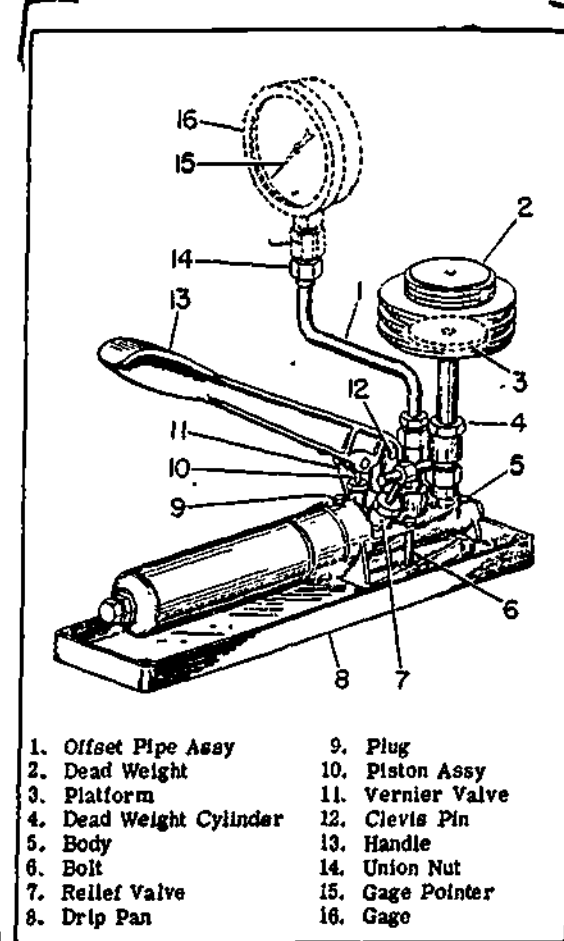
Setup of Part Number 10-10525 Hydraulic Pressure Gage Dead Weight Tester for Operation (Serial Number 1056-81 and Subsequent)
